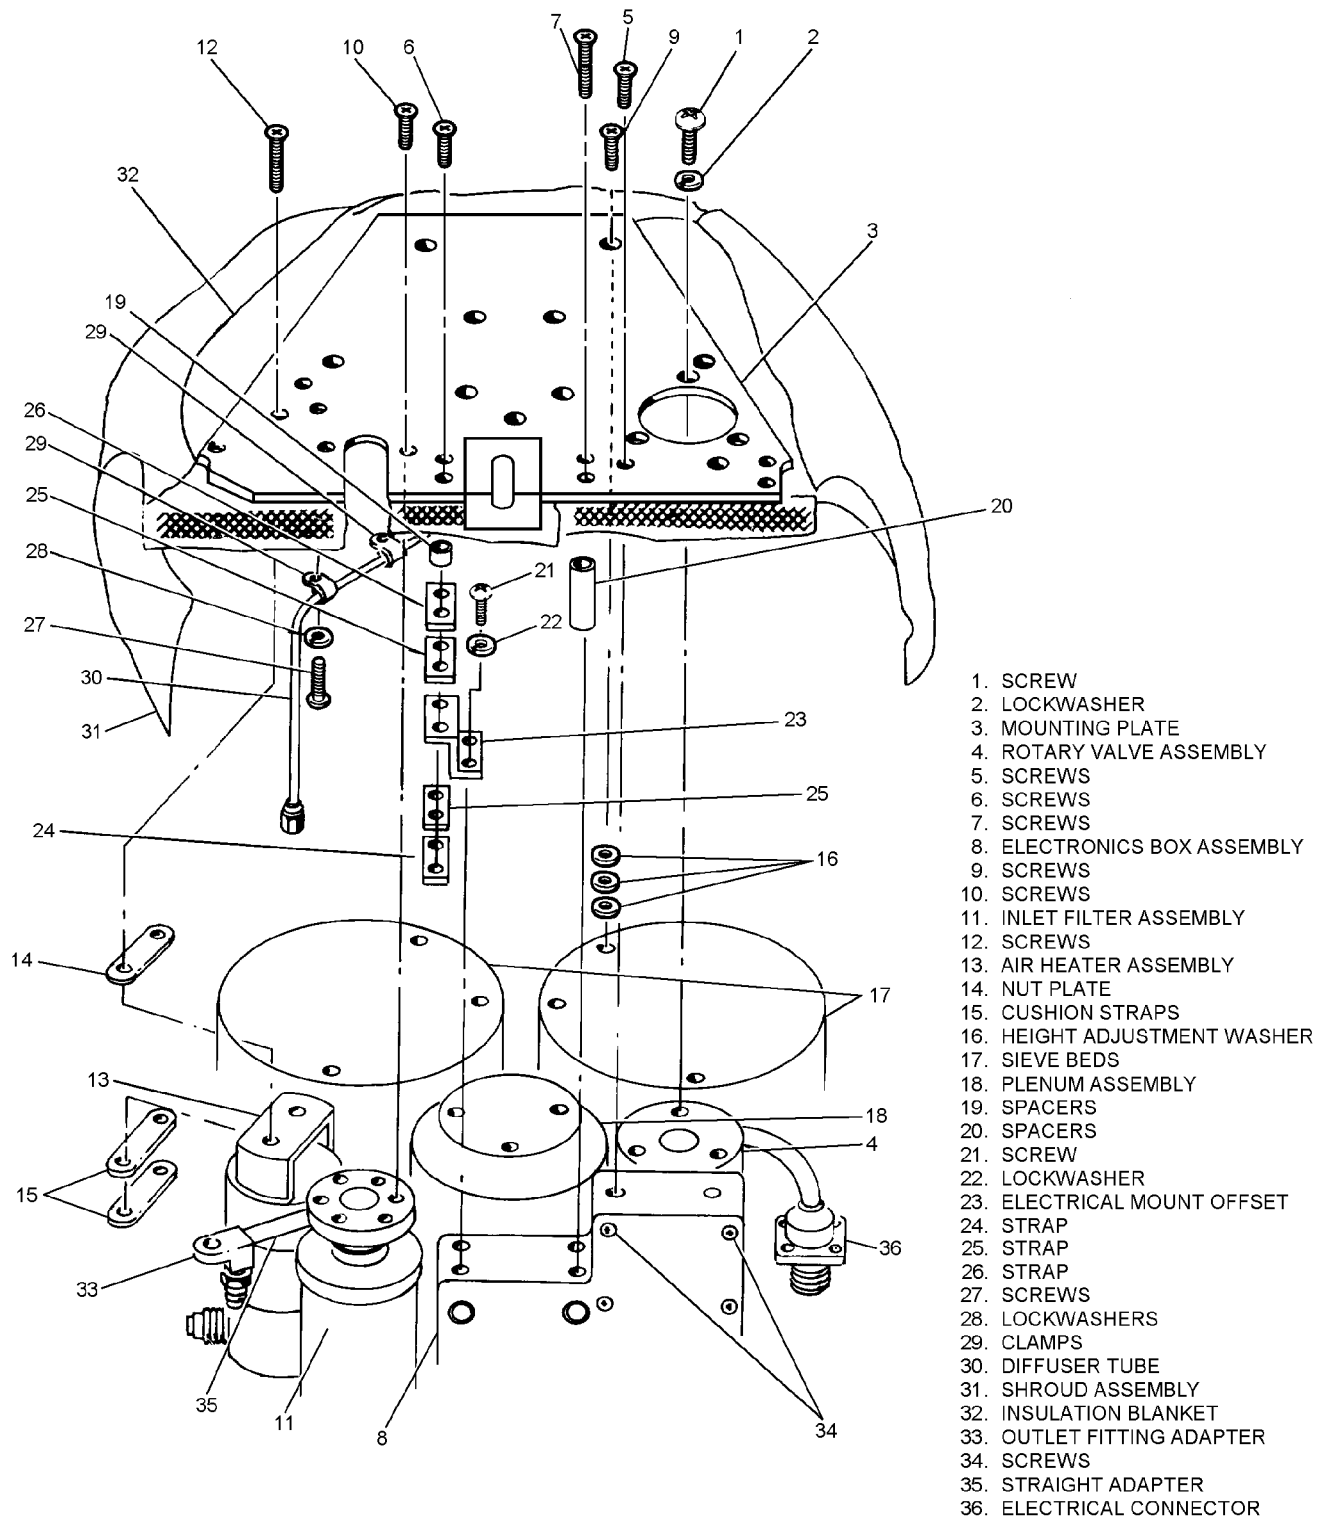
Shroud Assembly/Mounting Plate Removal/Assembly
